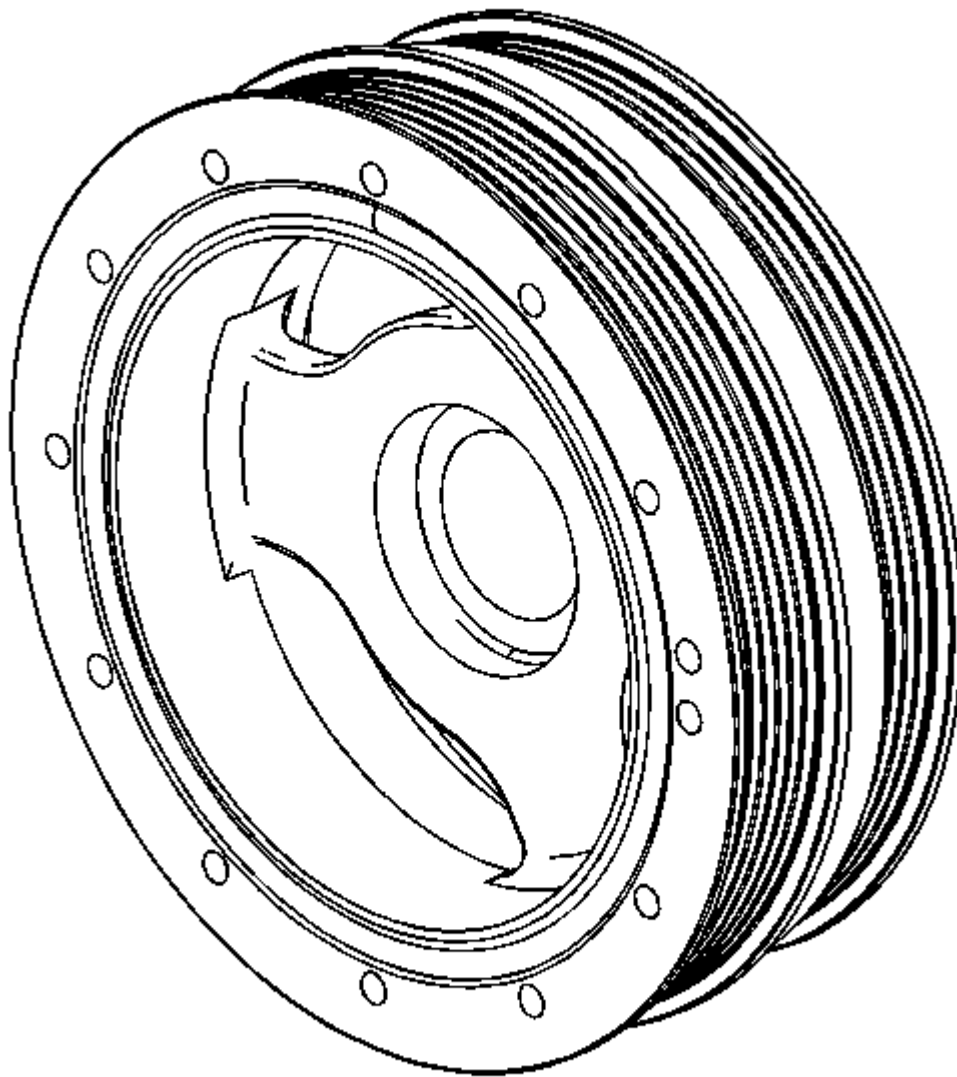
Crankshaft BalancerCourtesy of GENERAL MOTORS CORP.
